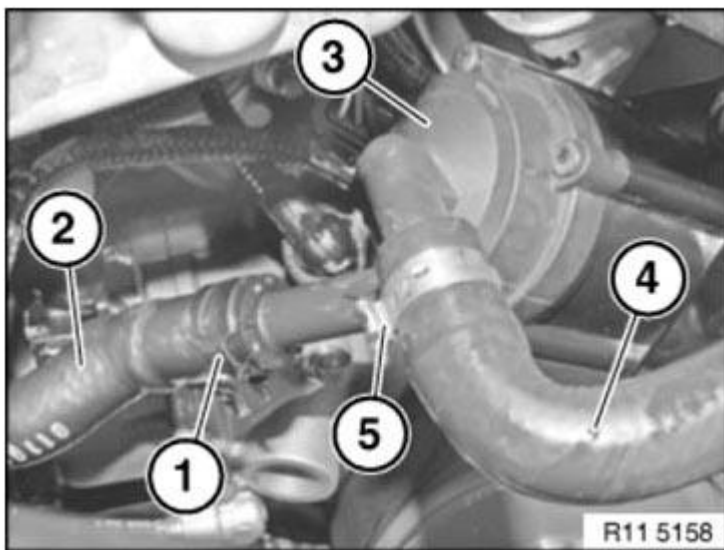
Identifying Auxiliary Water Pump, Coolant Hose And Hose Clamp
